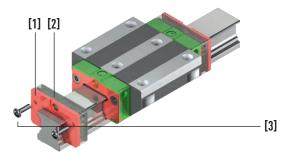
Exploded view of self-lubricating EC block for the CG series
